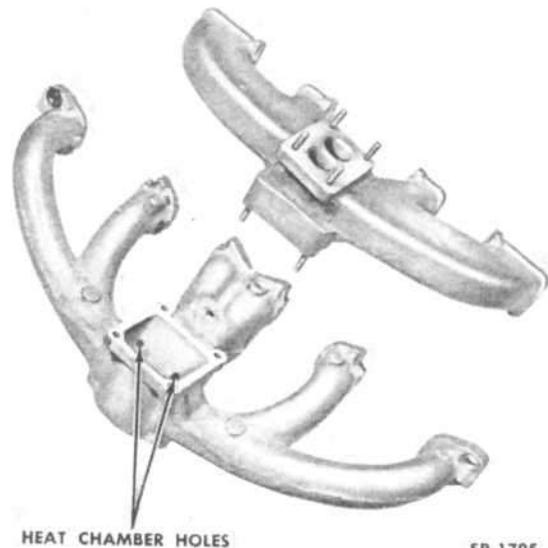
MODEL L6-226 INTAKE AND EXHAUST MANIFOLD (Double-throat Carburetor)
